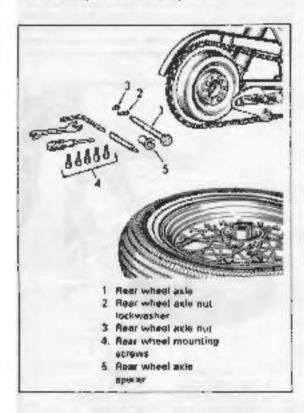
Removing Reer Wheel (1972 and Earlier)
